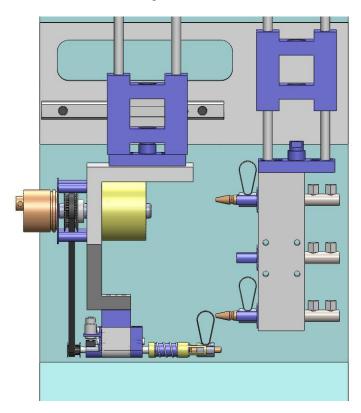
A different view of the complete EDM-tool mounted on linear actuators.
